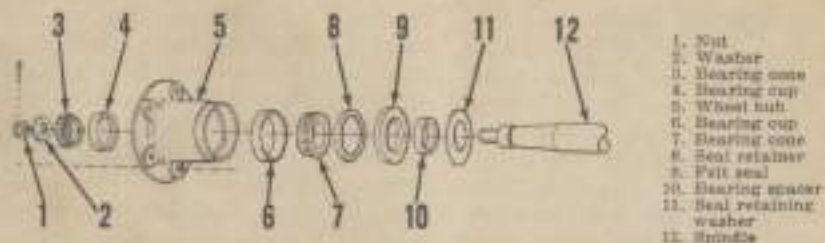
Exploded view of front wheel hub assembly used on dual front wheel tricycle models. Wide front axle models are similar except spacer (10) and washer (11) are not used.
